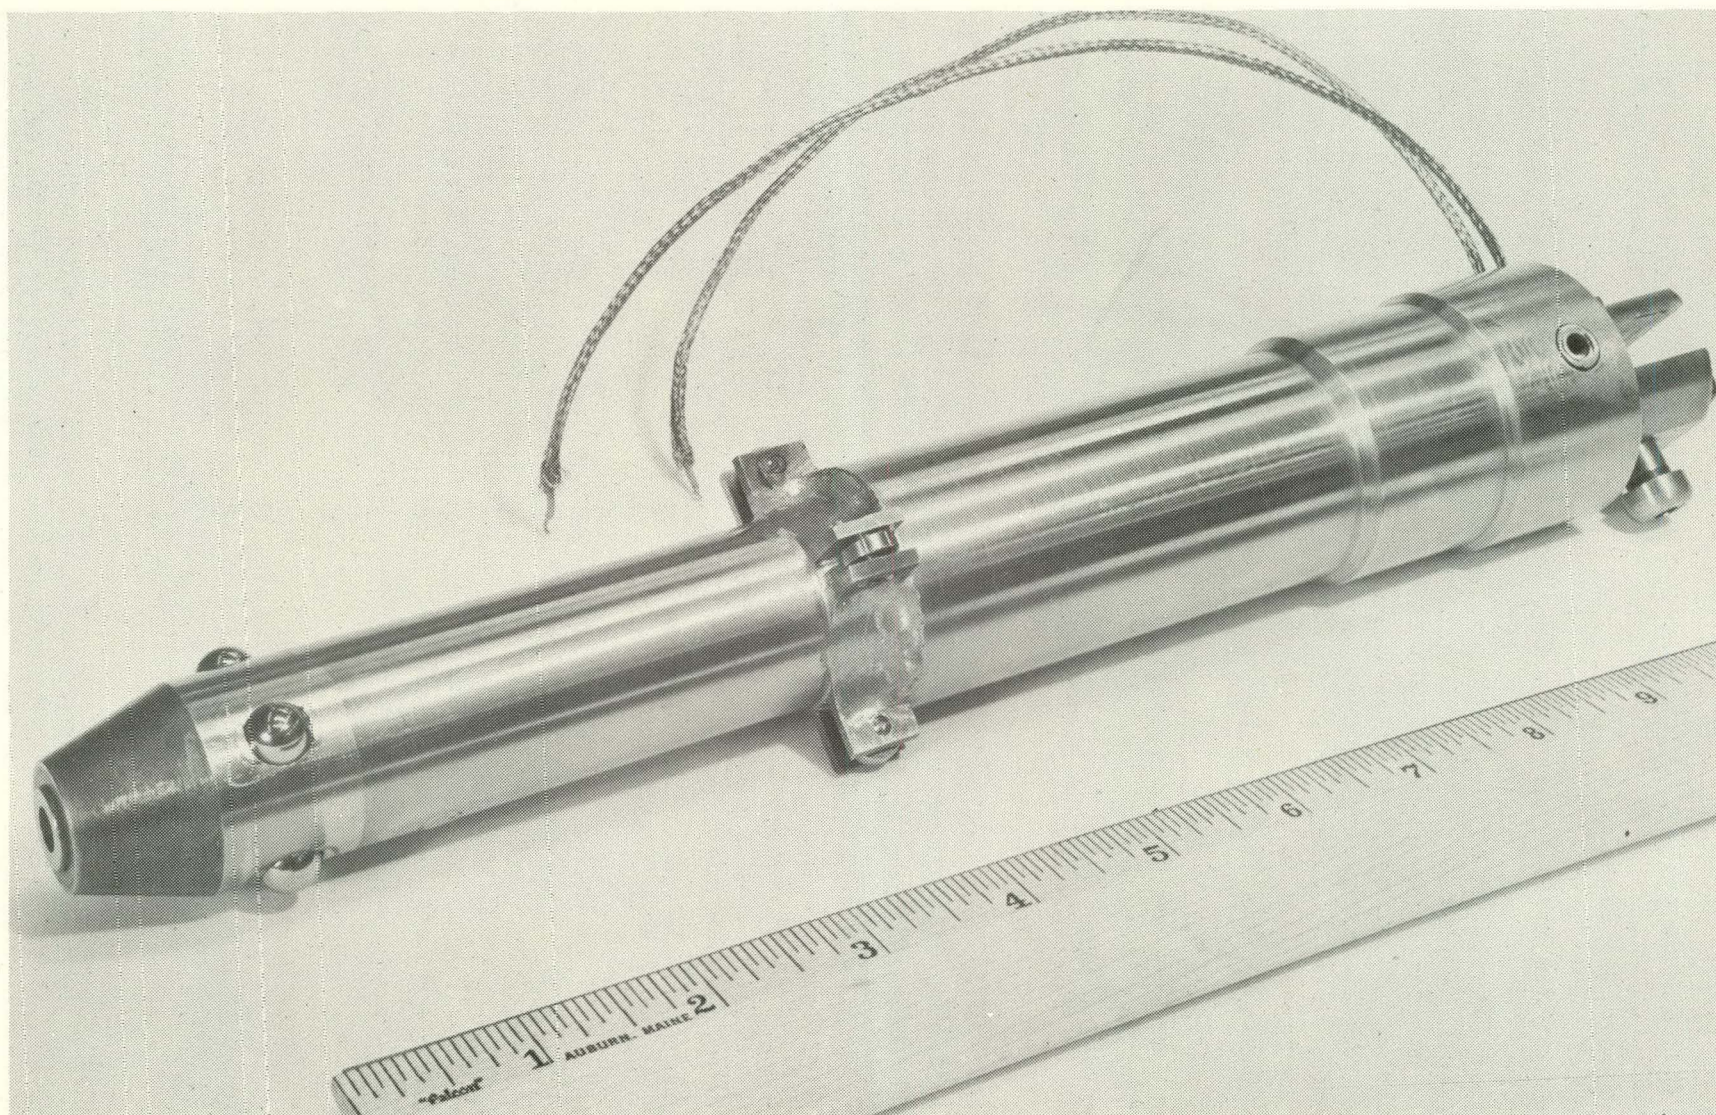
GCRE-I CONTROL ROD ELECTROMAGNETIC BALL LATCH
